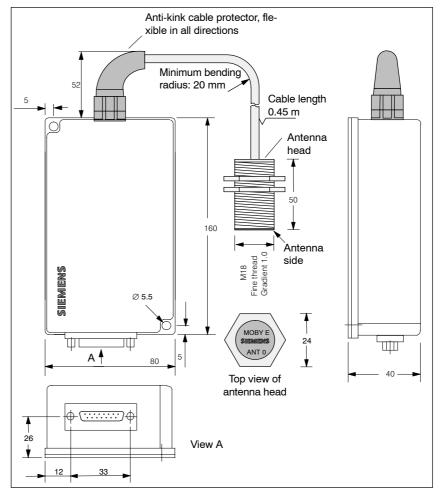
Dimensioned drawing of the SIM 70 ANT 0
